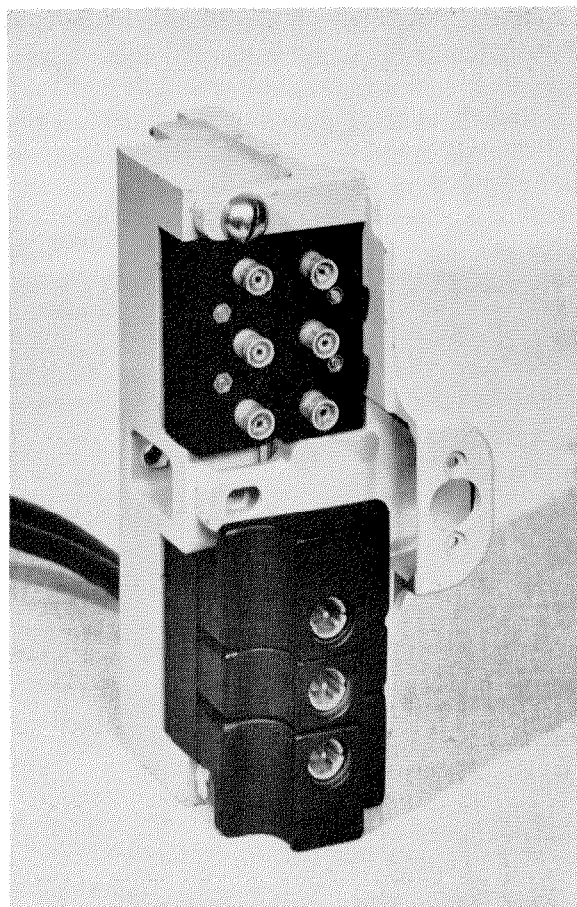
Bay-to-panel coaxial connectors assembled in die-castings for 5 $\frac{1}{4}$ -inch panels.
